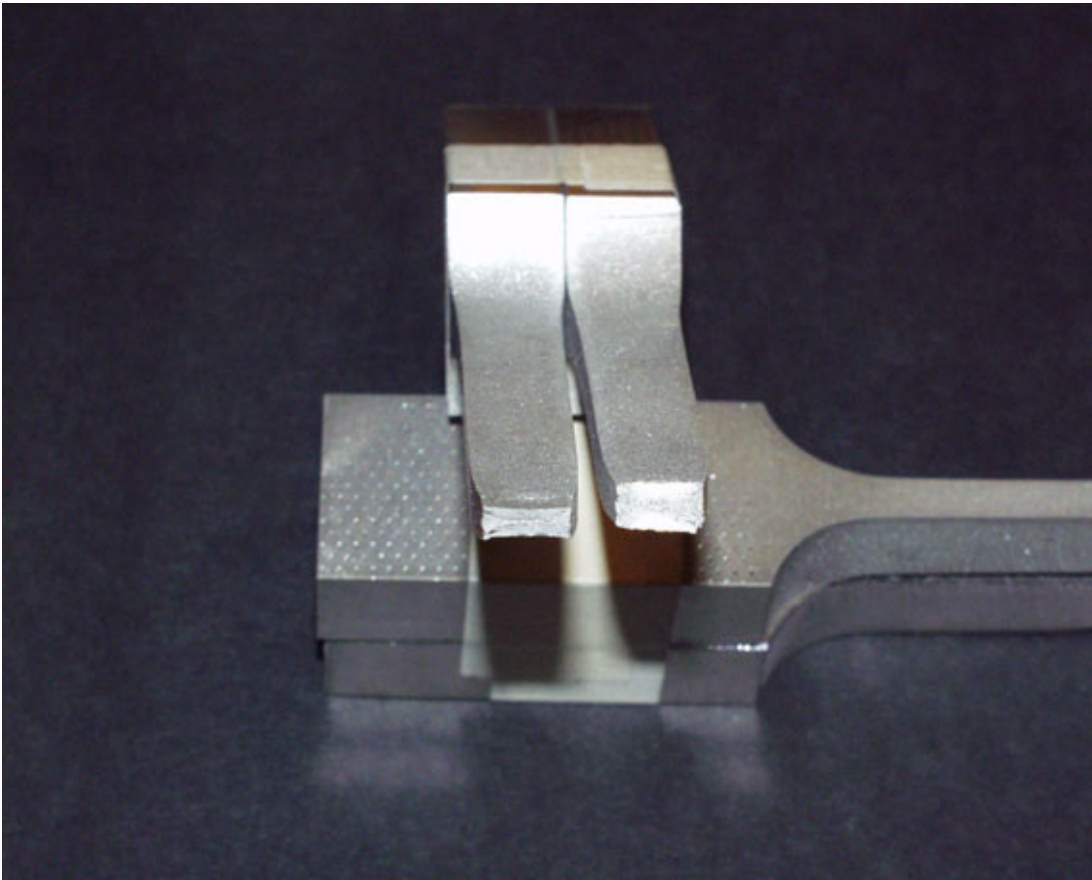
Typical Failure Surface of Nitronic 33 Tensile Specimen
